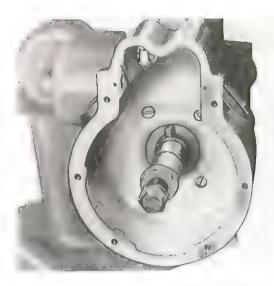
Removing the coupling of the vibration damper from the pump camshaft using puller A 427011.
